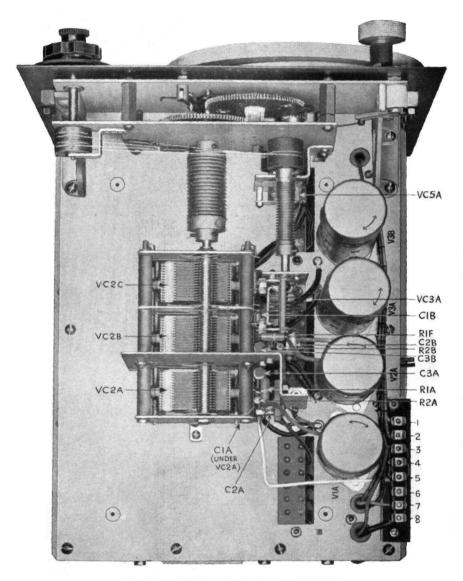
BOTTOM VIEW OF R.F. CHASSIS. (Gang Condenser Cover Removed).
